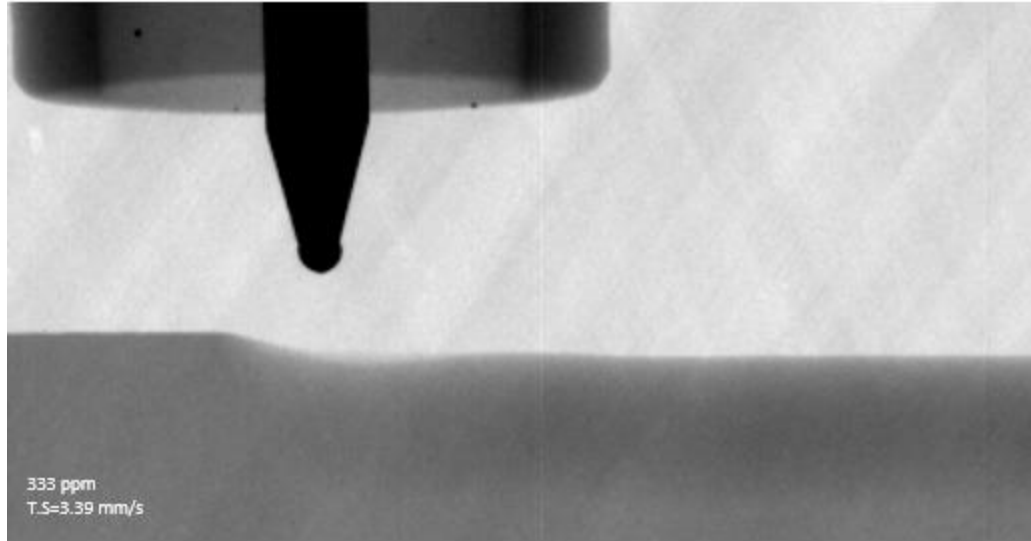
Alloy 6061 welded using 333 ppm of shielding gas hydrogen at 3.39 mm/s.
